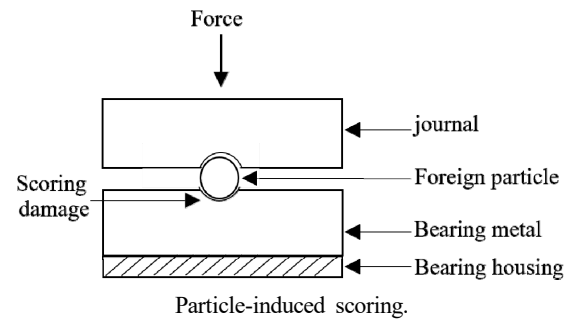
Three-body abrasive wear mechanism in a journal bearing
